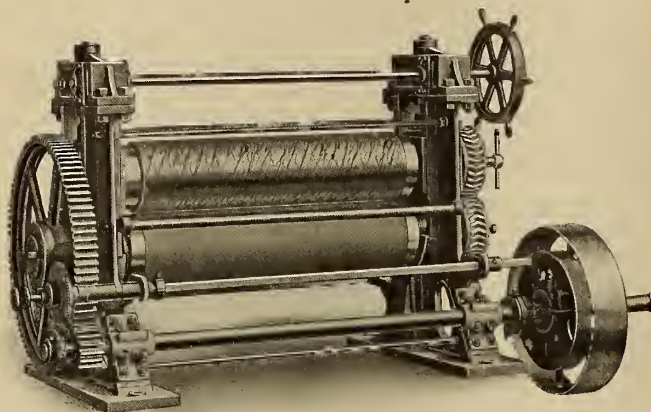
TWO-ROLL EMBOSSING MACHINE
